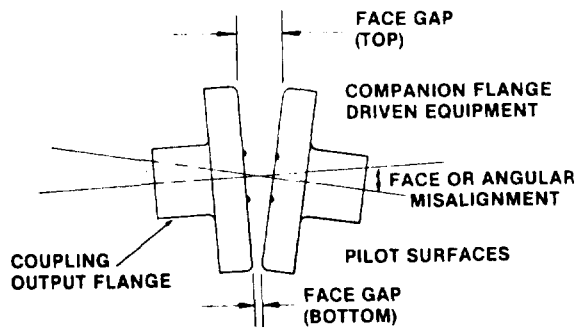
Angular or Face Misalignment of Generator Coupling. (Courtesy Caterpillar, Inc)
